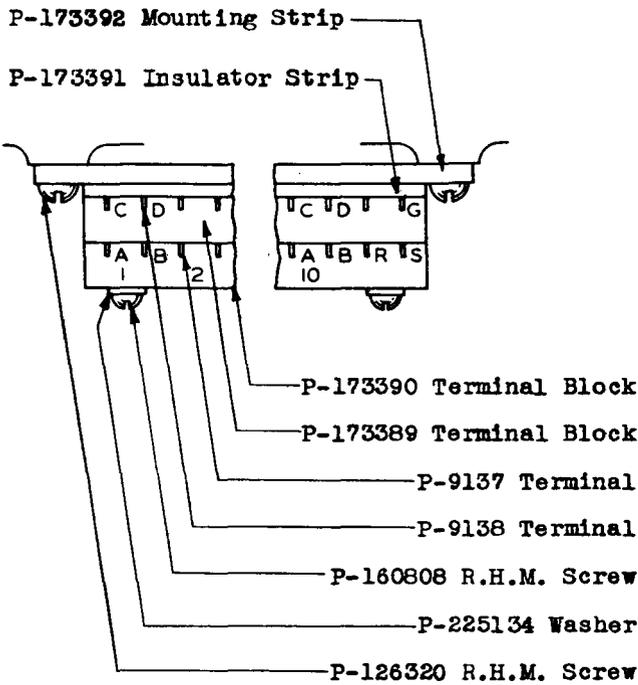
Terminal Block Assembly Parts (No. 168B Interrupter)
